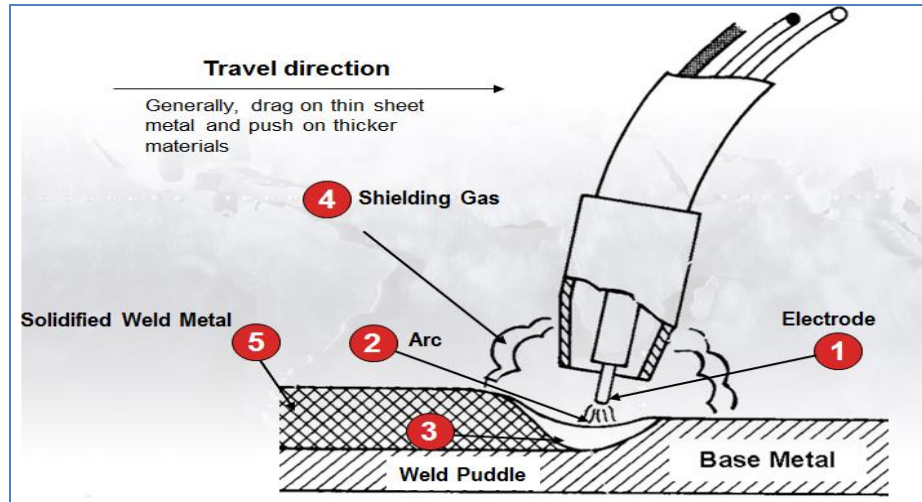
Gas Metal Arc Welding (GMAW) process
